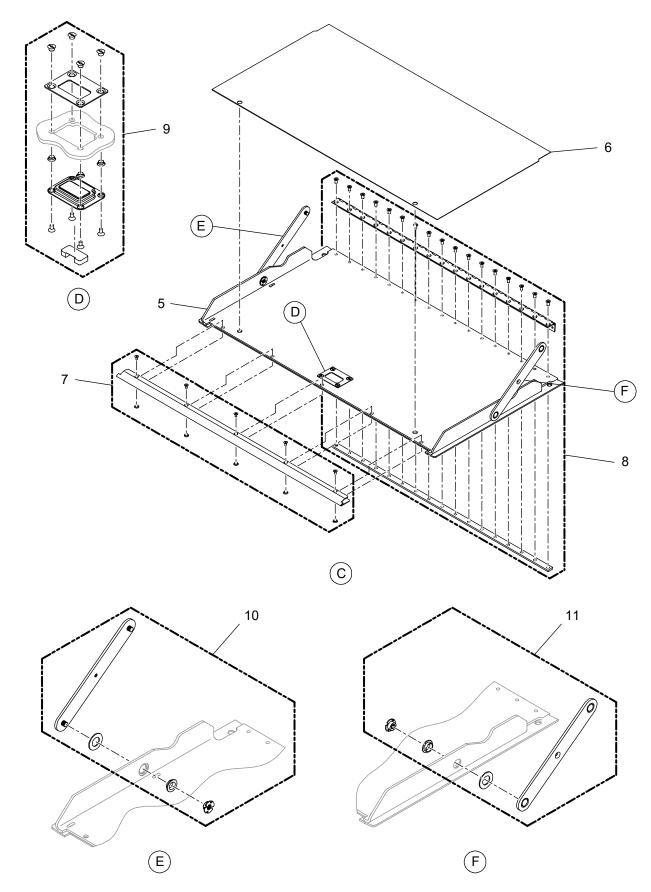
FR2E-SERIES RAMP ASSEMBLY (SHEET 3 OF 5)
